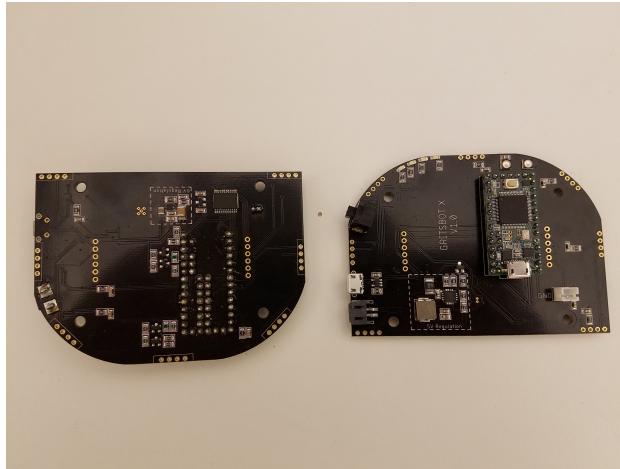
The GRITSBot X main PCB after mounting the Teesny microcontroller, JST PH 2-pin male header, and power switch.
